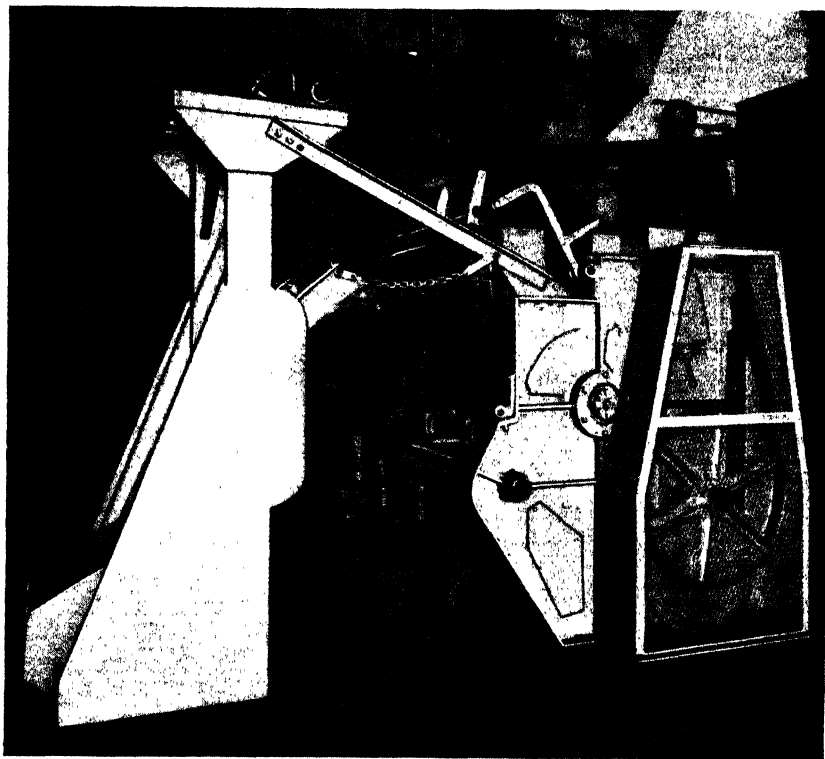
Tilghmann "Wheelabrator" Abrasive Machine.
